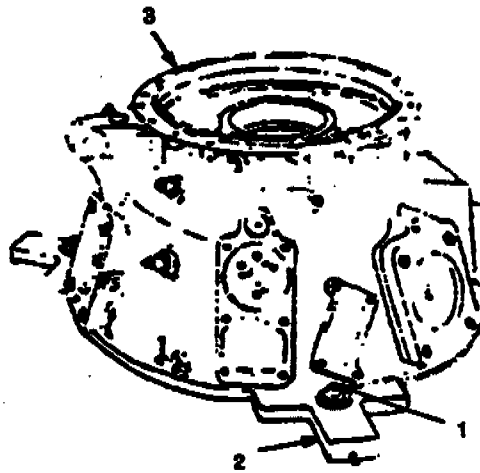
Variable Air Inlet Guide Vane Assembly Removed.
